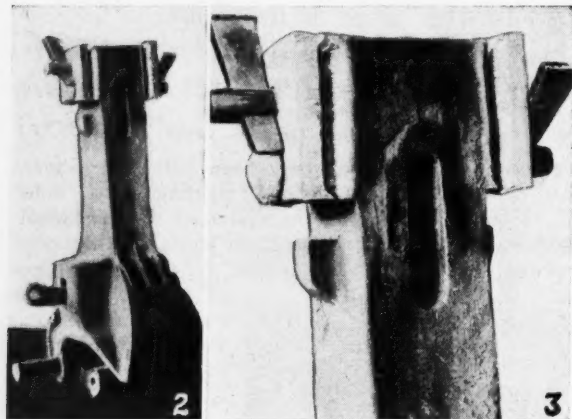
An old-style coupler that is to be repaired to conform to the size of the new style couplers. Fig. 3—The shank with plates clamped in place for welding on.
